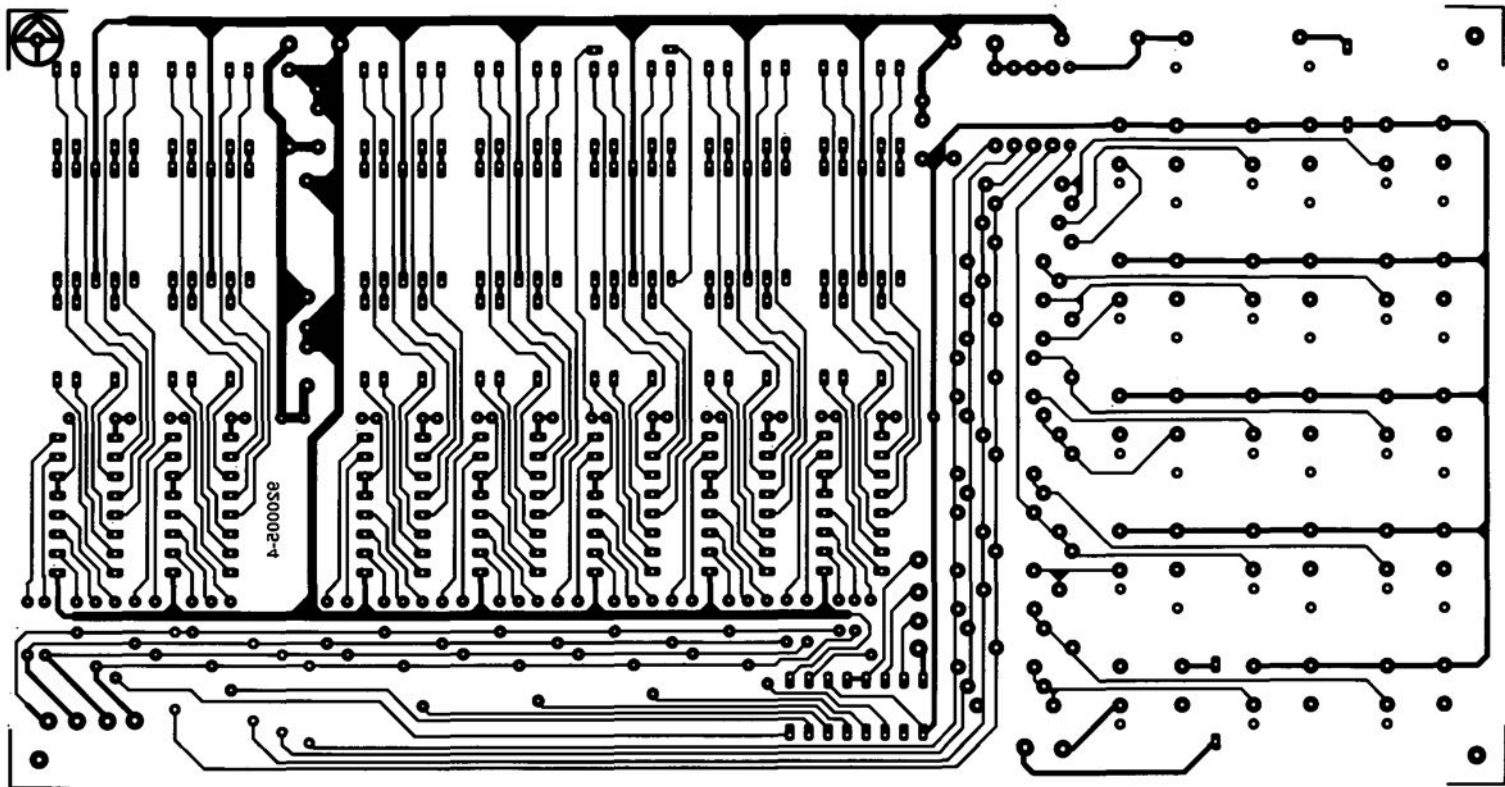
Track layout (mirror image) and component mounting plan of the keyboard/display PCB.
